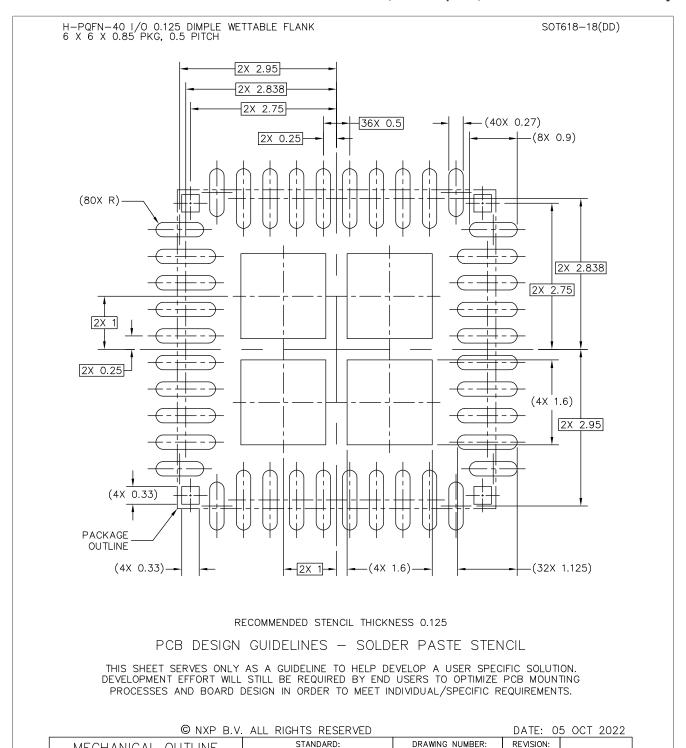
Reflow soldering footprint part3 for HVQFN40 (SOT618-18(DD))
